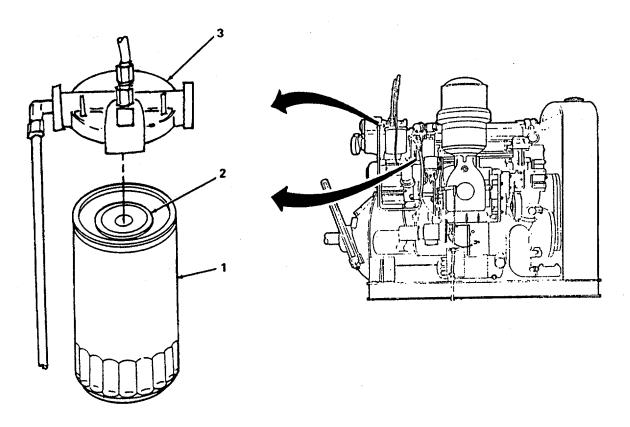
Diesel Engine Fuel Filters Replacement.
